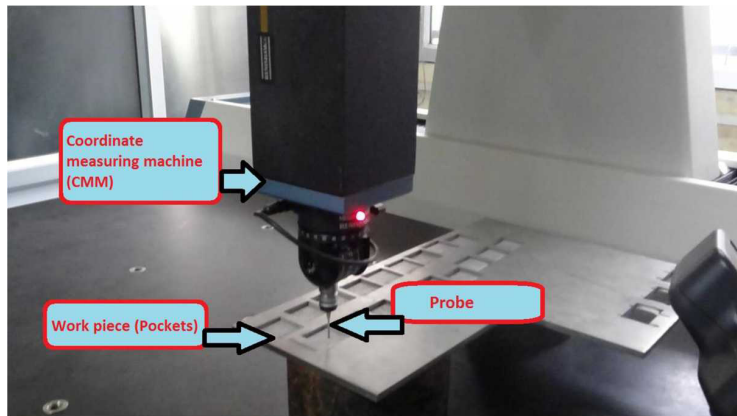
Measurement of pocket depth through Coordinate measuring machine (CMM)
